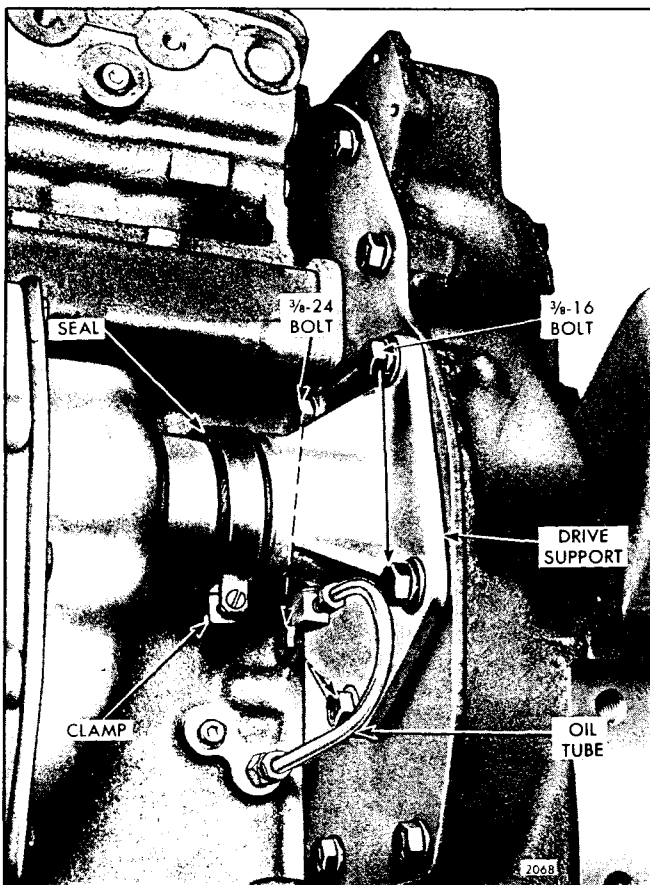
Blower Drive Support Mounting on 4-53 In-Line Engine
